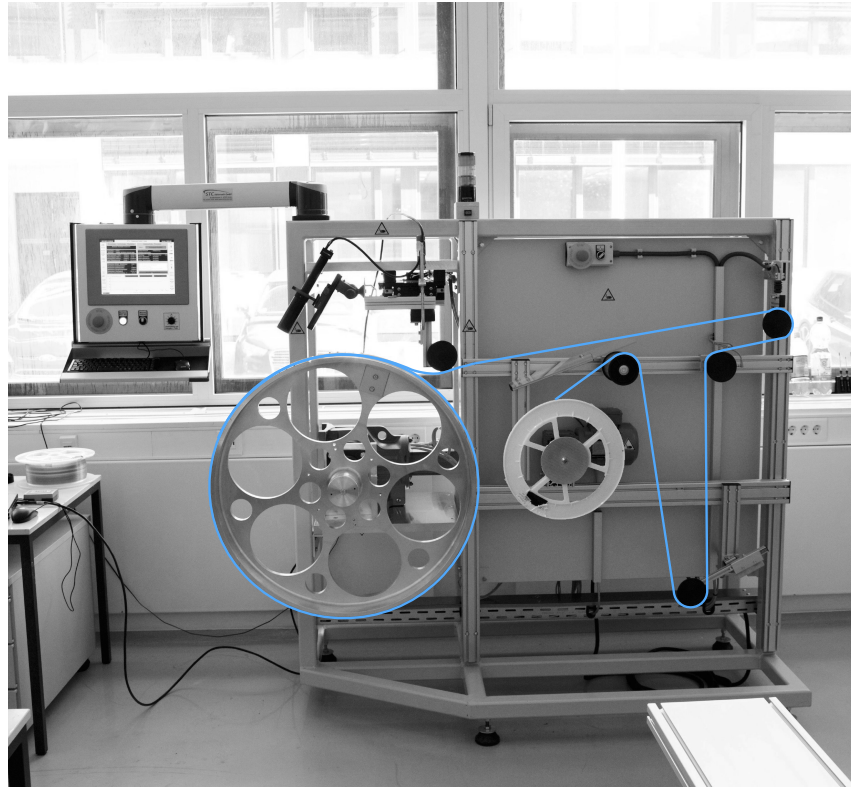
Winding machine for the serial production. The blue indicates the path of the fibre.
